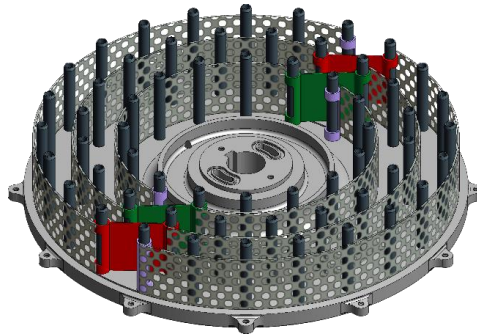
CAD drawing of the rotor of the CRPB with its integrated cooling channels.
